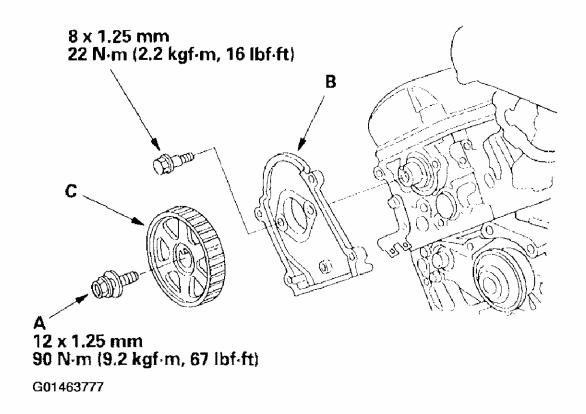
Installing Camshaft Pulley Mounting Bolt, Back Cover & Camshaft Pulley
